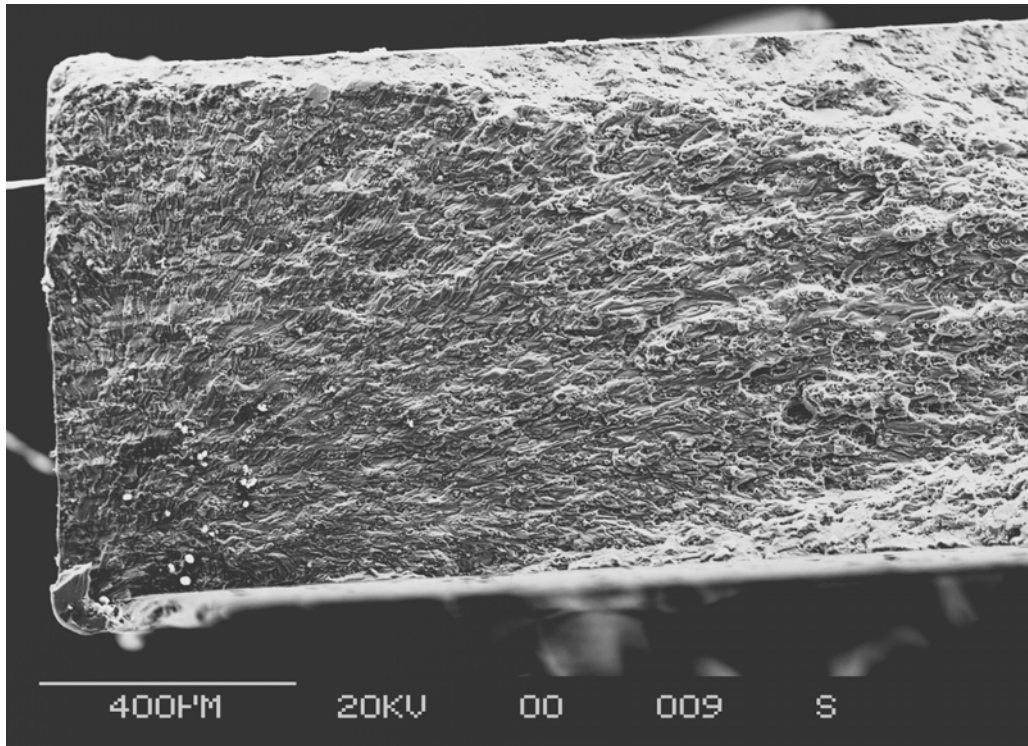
Fatigue Crack on Fracture Surface of Specimen 5869.
